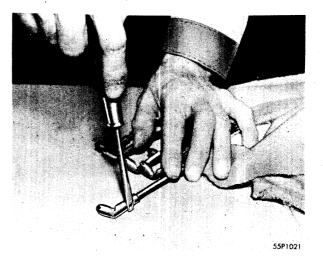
Bending Locking Tab to Remove Clip from Bow
